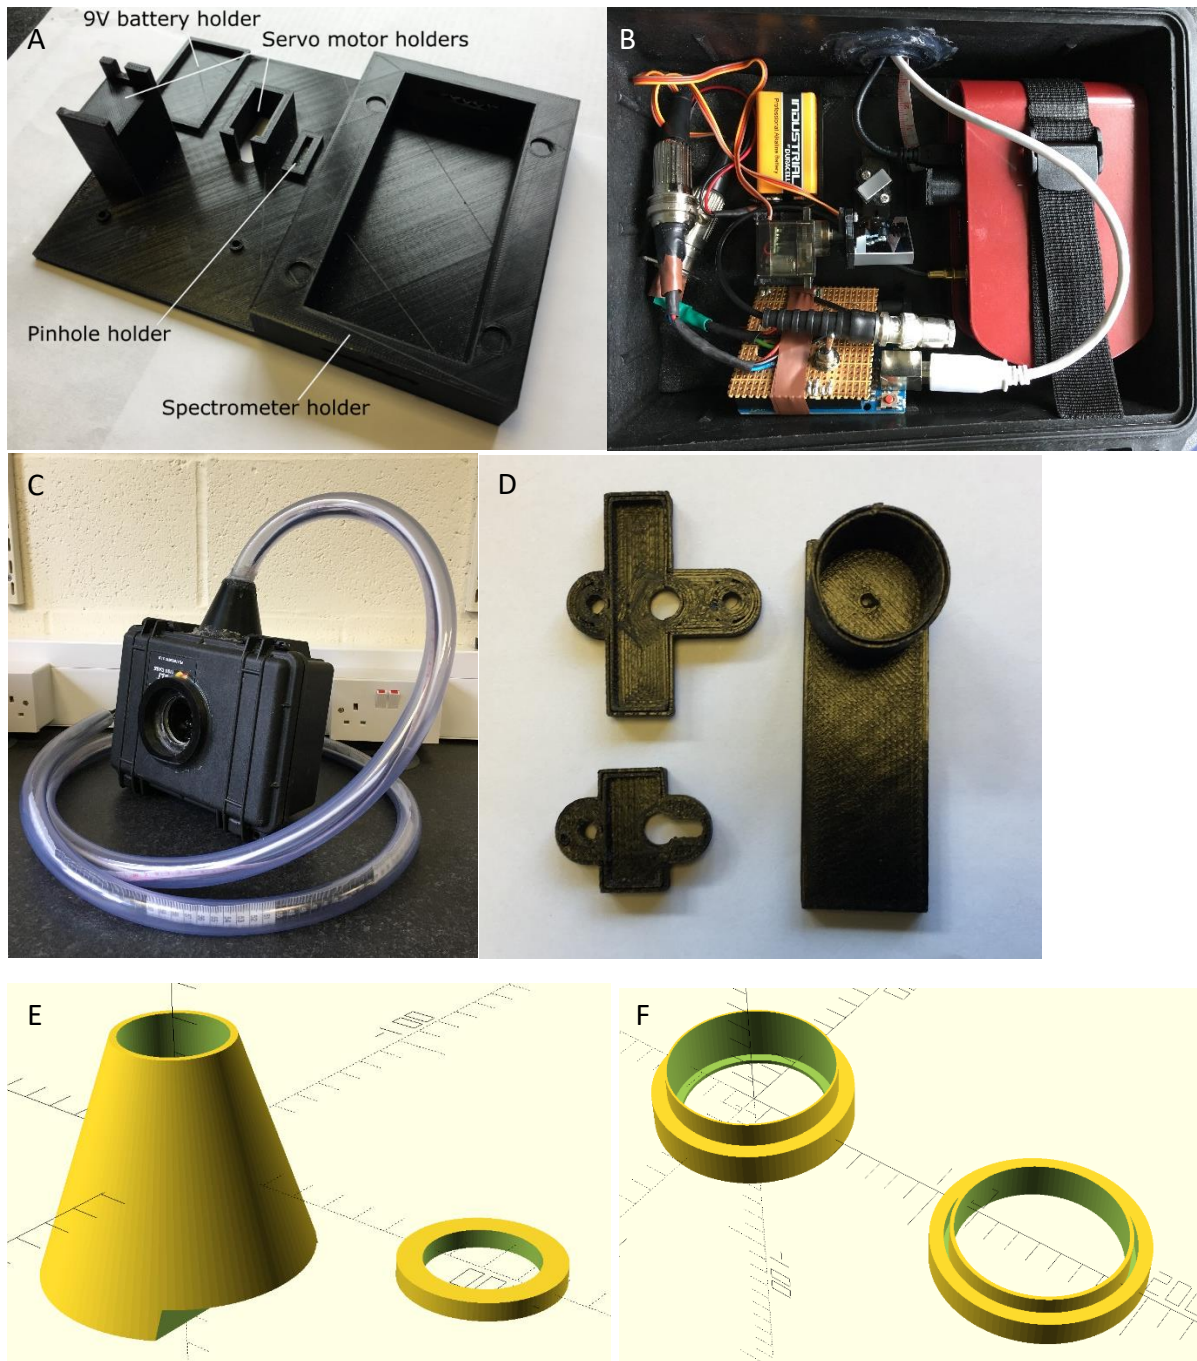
A, 3D printed base showing slots for 9V battery, two servo motors, a pinhole and a spectrometer. The higher servo motor holder should be the one holding the big mirror and the lower one holding the smaller mirror. In addition, we drilled two small slits to use a strap to secure the spectrometer to the base. B, The base inside the protector case with all the components. C, The complete scanner with waterproofed housing. D, 3D printer mirror holders and a pinhole. E, Screenshot of the 3D parts for the outside (left) and the inside (right) support parts for the tube. F, Screenshot of the 3D parts for the base (left) and the cap (right) parts of the window holder.
